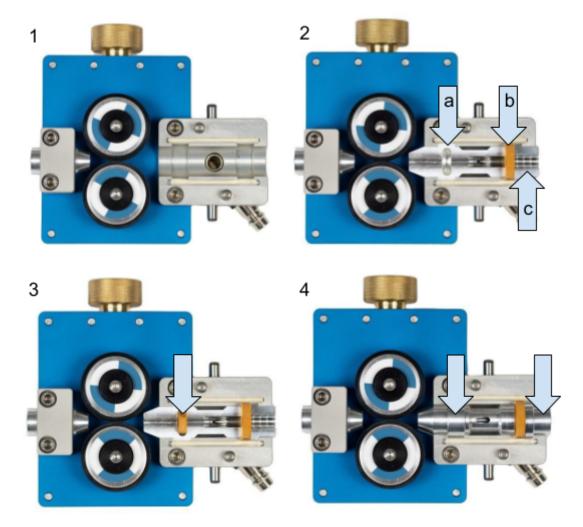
Installation of sleeves and seals inside the BDJ Budget Plus head
